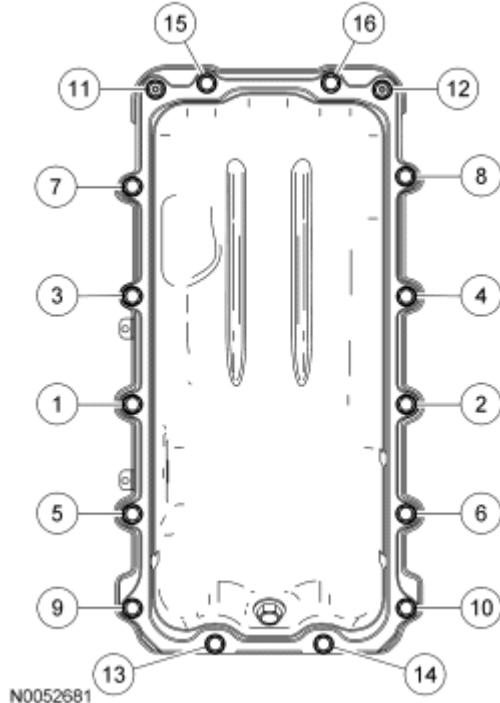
Installing Oil Pan Bolts & Stud Bolts In Sequence
